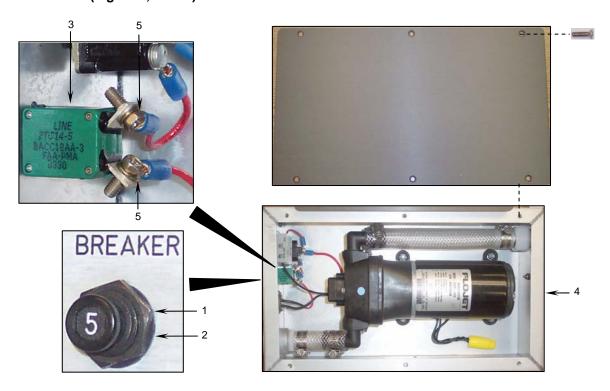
Removing the Sink Fill Pump Assembly Circuit Breaker.
